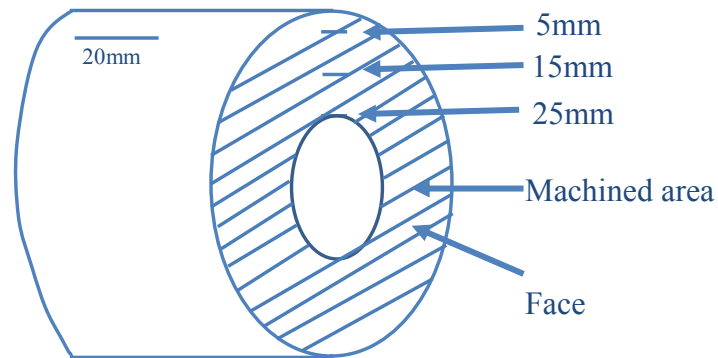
Schematic illustration of a machined specimen showing the measurement points
